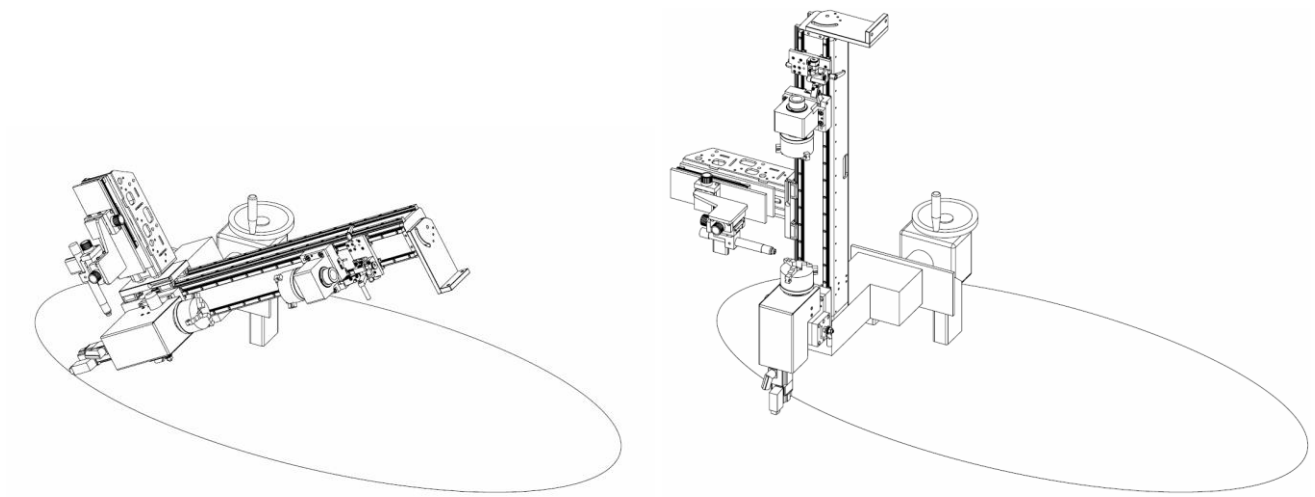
Manual swivel unit for welding axis for varying optimum welding position
